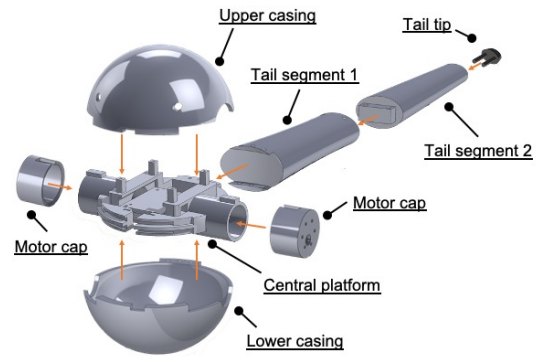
Exploded view of the ARMoR chassis consisting of the central platform top and bottom sphere cases, two motor housing parts, two tail segments, and a tail tip.
